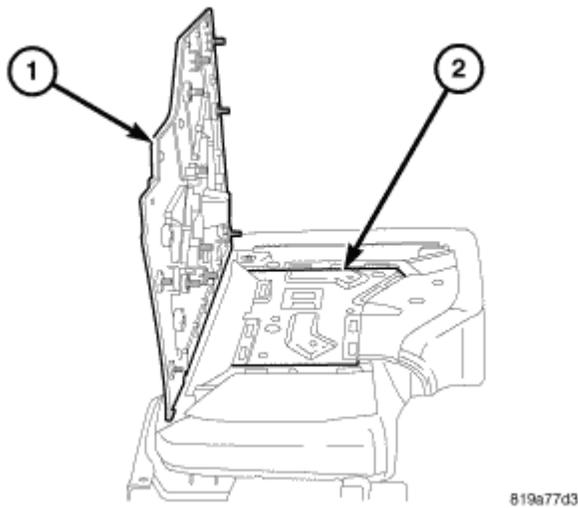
Seat Back Trim Panel & Seat Back Frame
